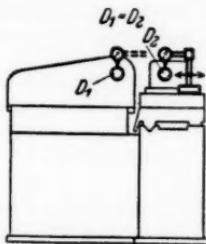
Checking height of main spindle and external grinding spindle. Dial gauge method.
